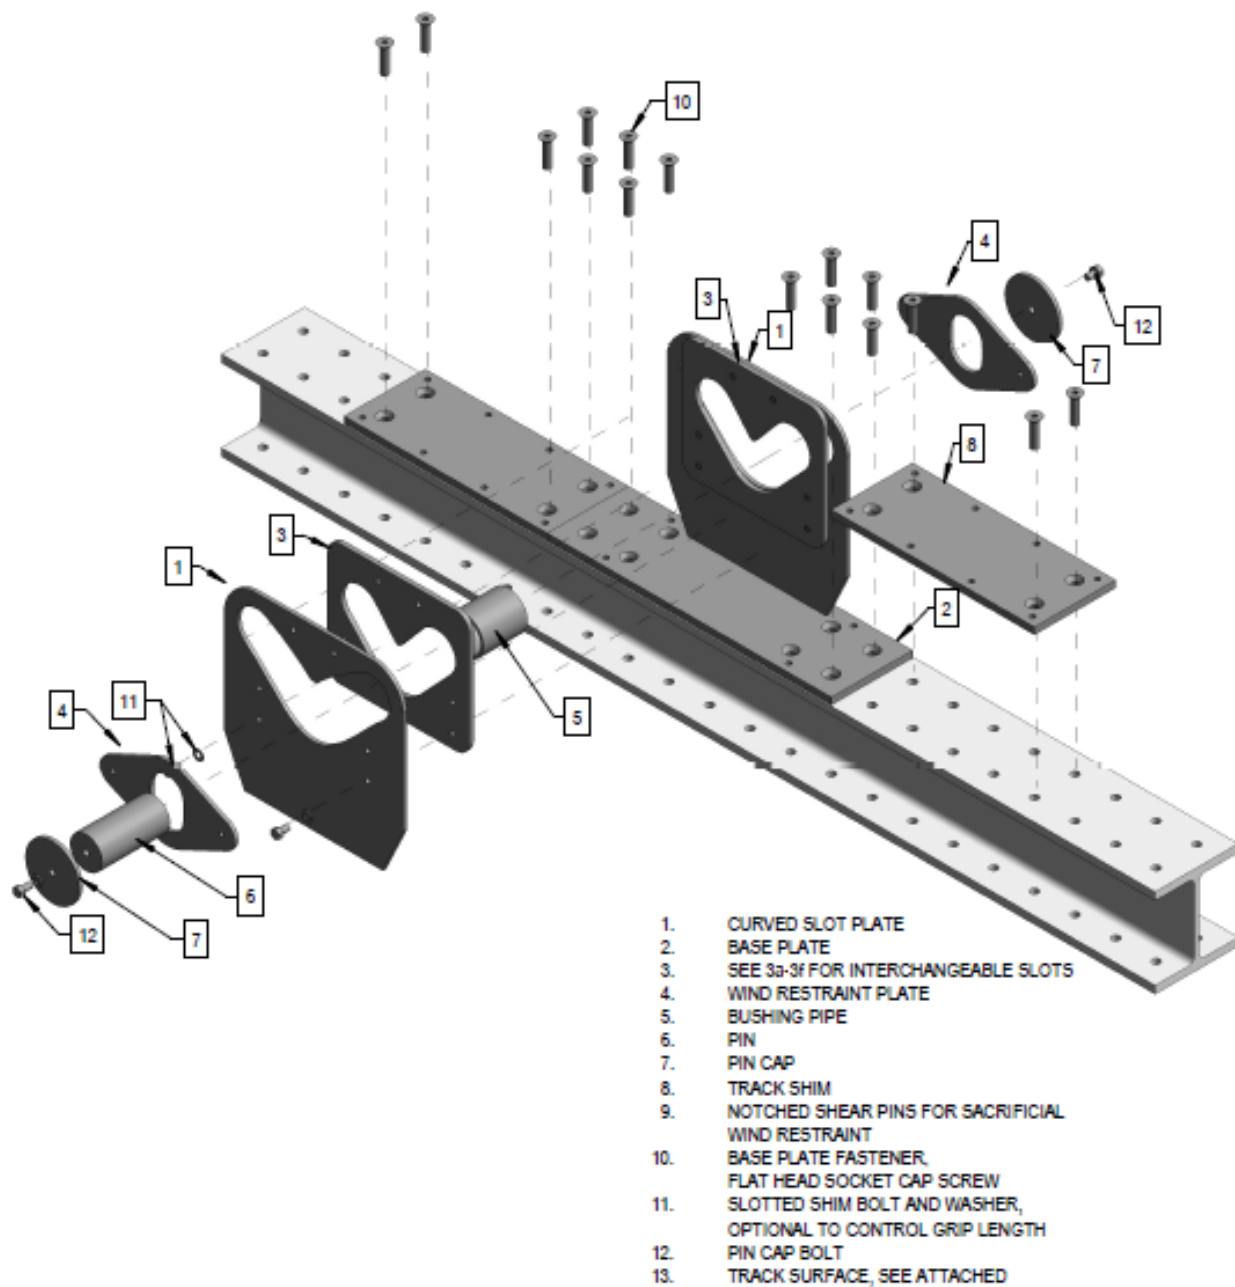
Exploded assembly list for No-Slip Traction Rolling steel connections
